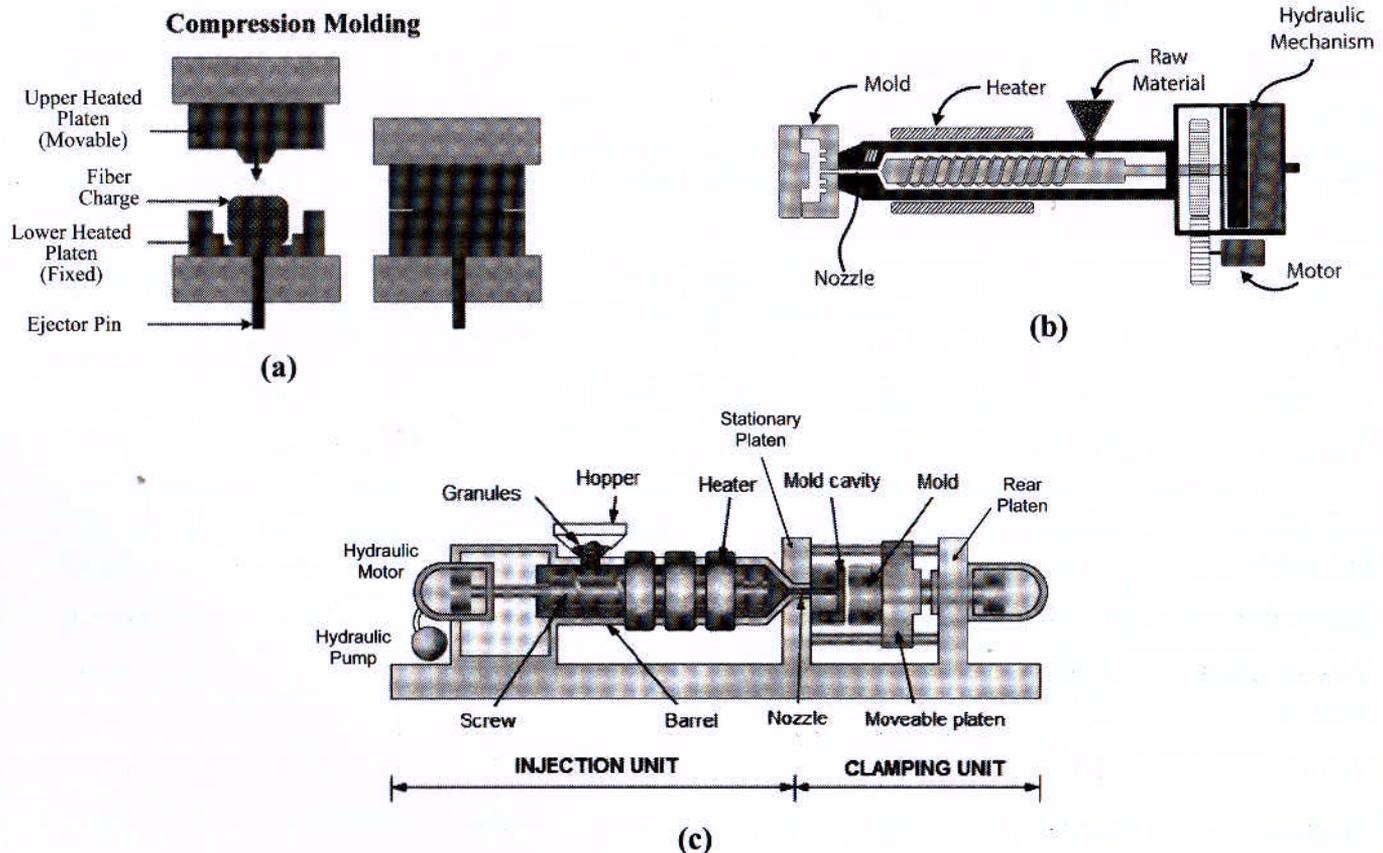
(a) Compression, (b) extrusion and (c) injection molding machines
